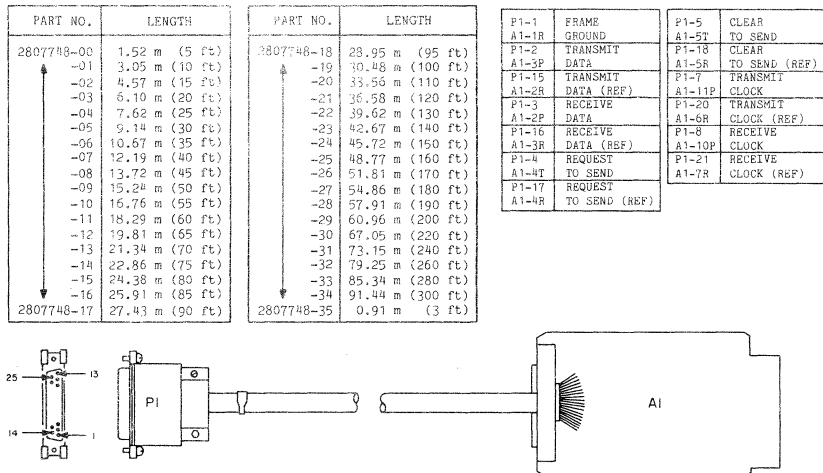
GCS Direct Connect Cable Assembly 6432694
